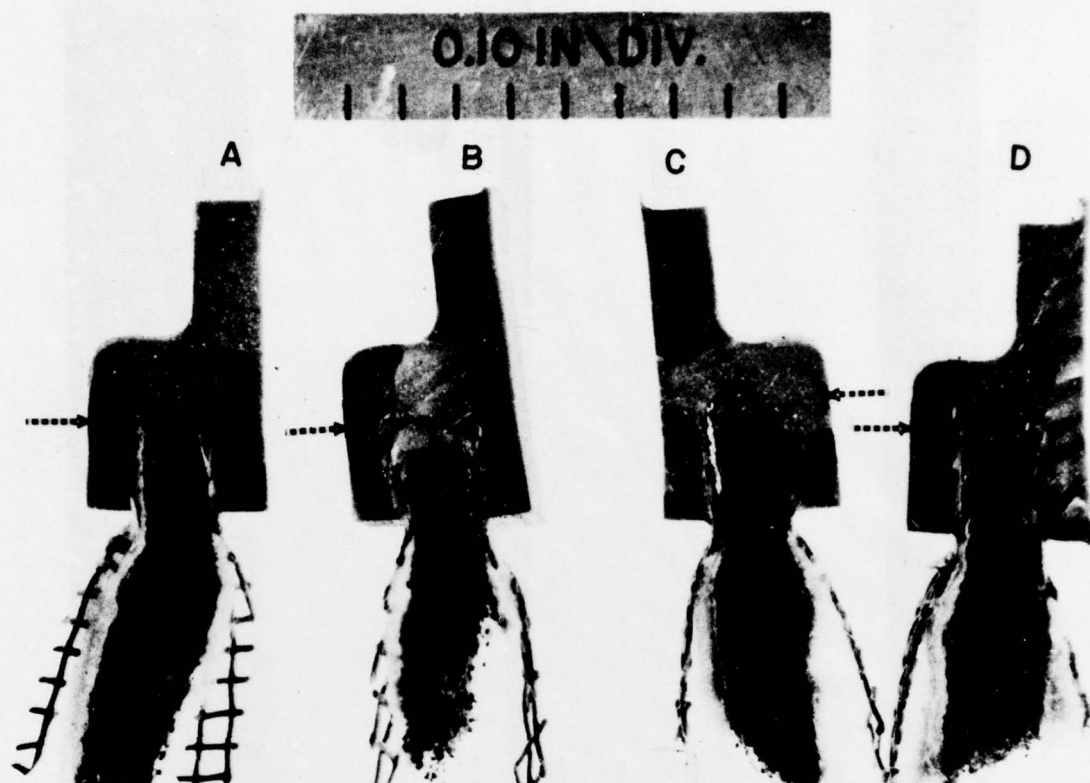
Sample Surfaces Showing Defects in M2 Filter
